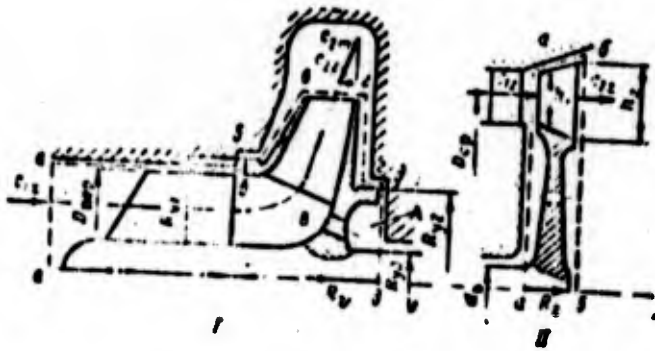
Determination of the axial forces which act on rotors of vane machines:
